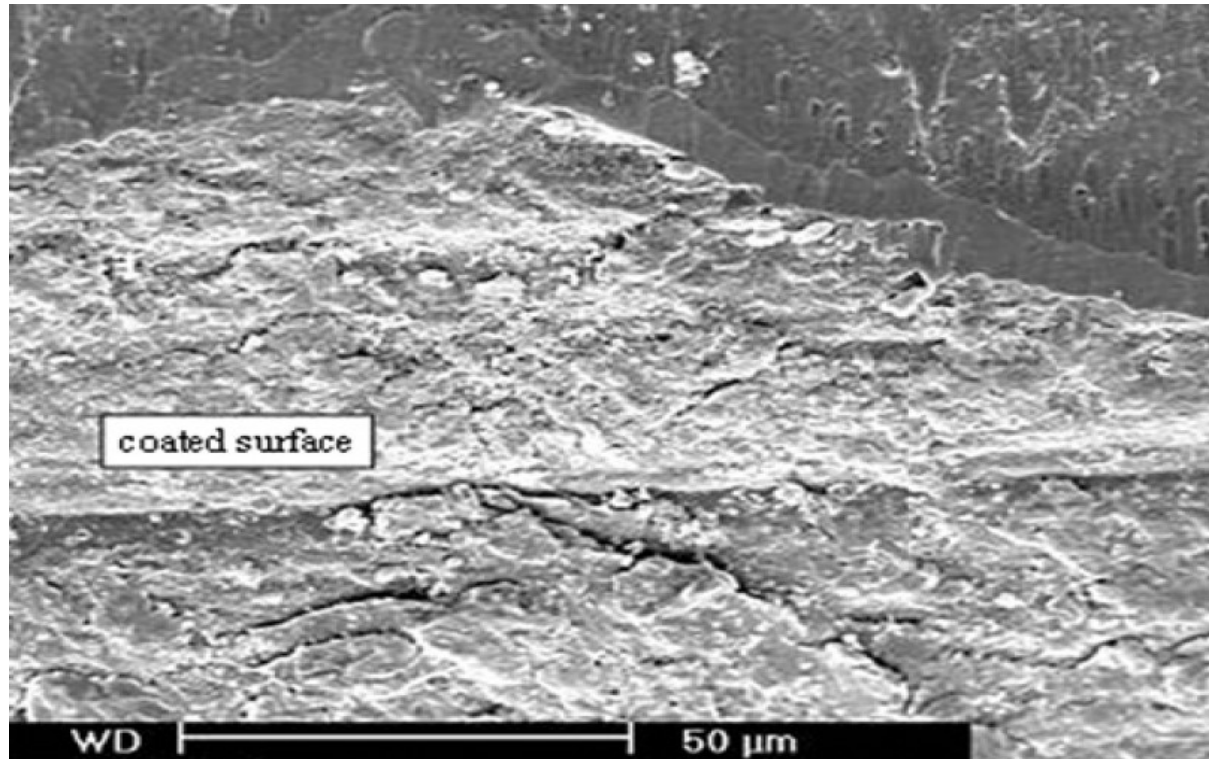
Cracks in the coating layer at the leading cutting edge after machining at speed 100 m/min, feed 0.15 m/min (Abdel-Aal et al., 2009).
